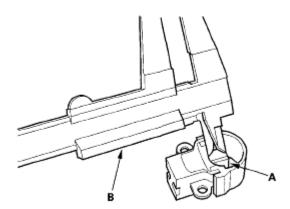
Measuring Length Of Both Brushes With Vernier Caliper
